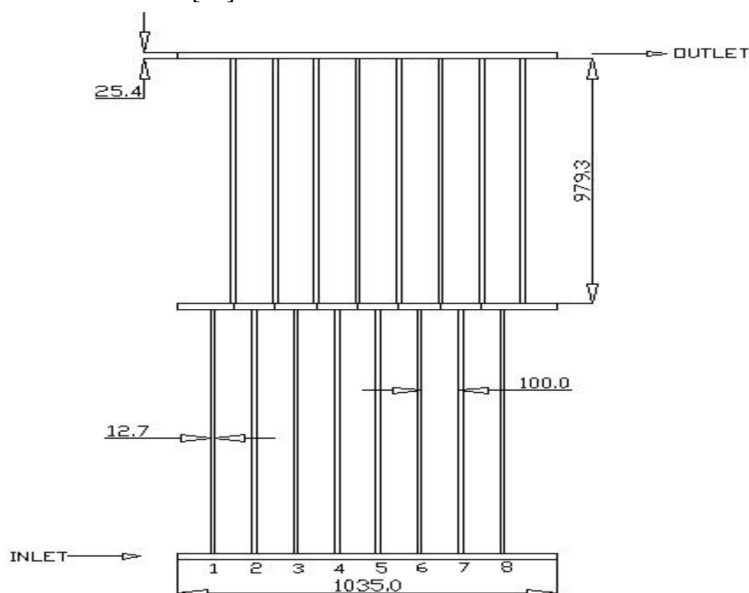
Sectional view of zig zag Flat Plate Collector (FPC) [21].
